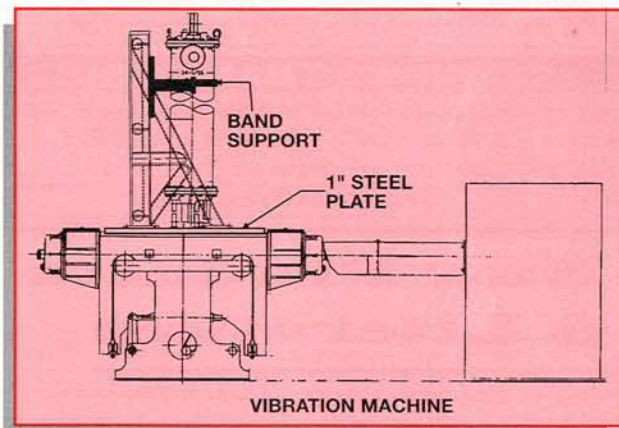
Side view of heat exchanger mounted on its fixture with added support around its middle.
